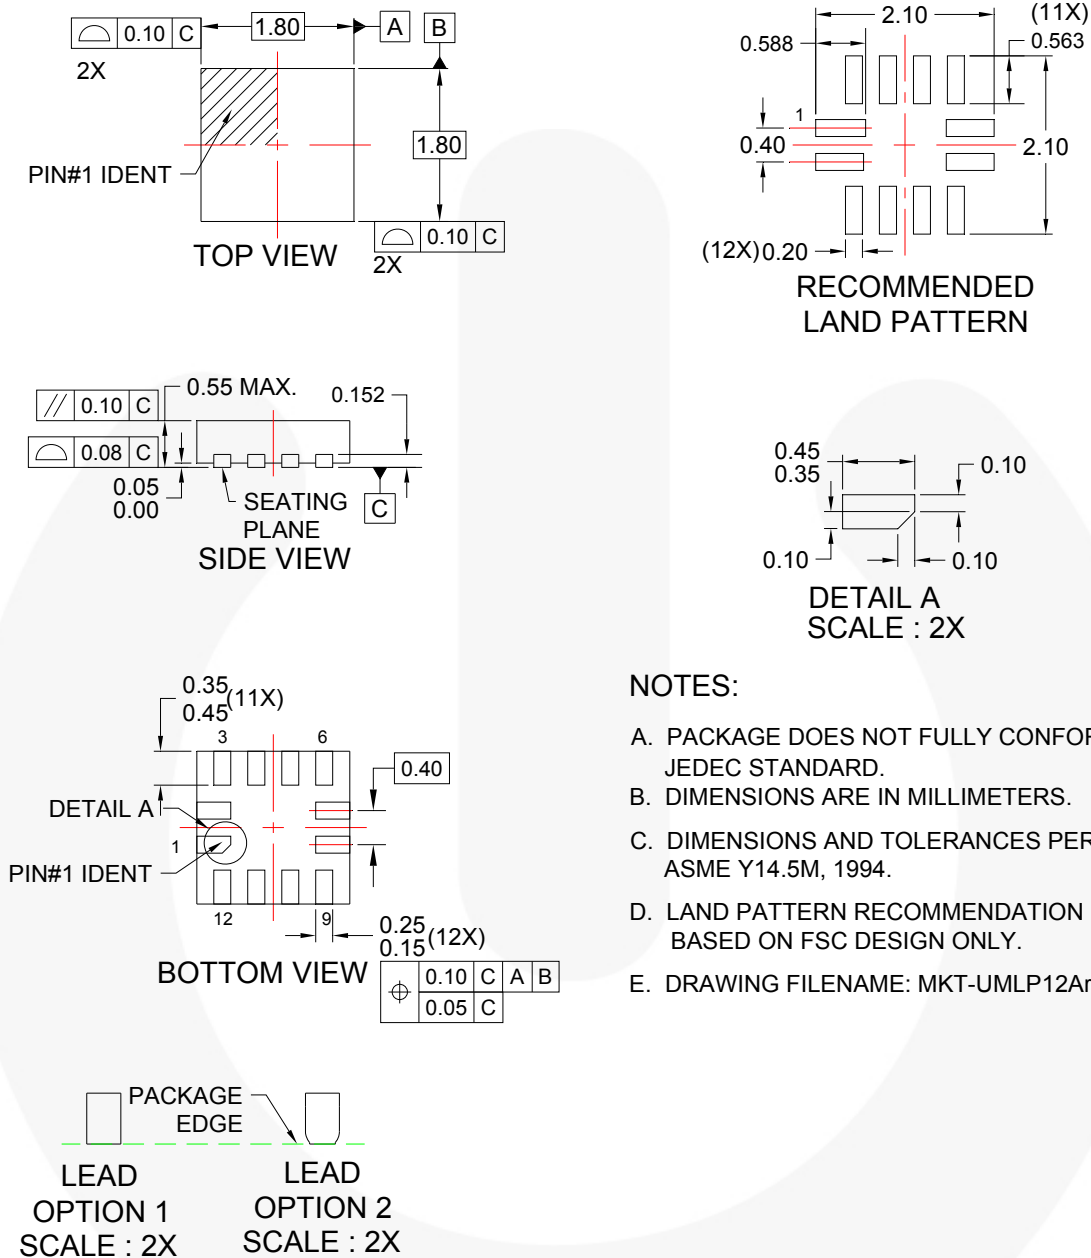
12-Lead, Ultrathin Molded Leadless Package (UMLP)
